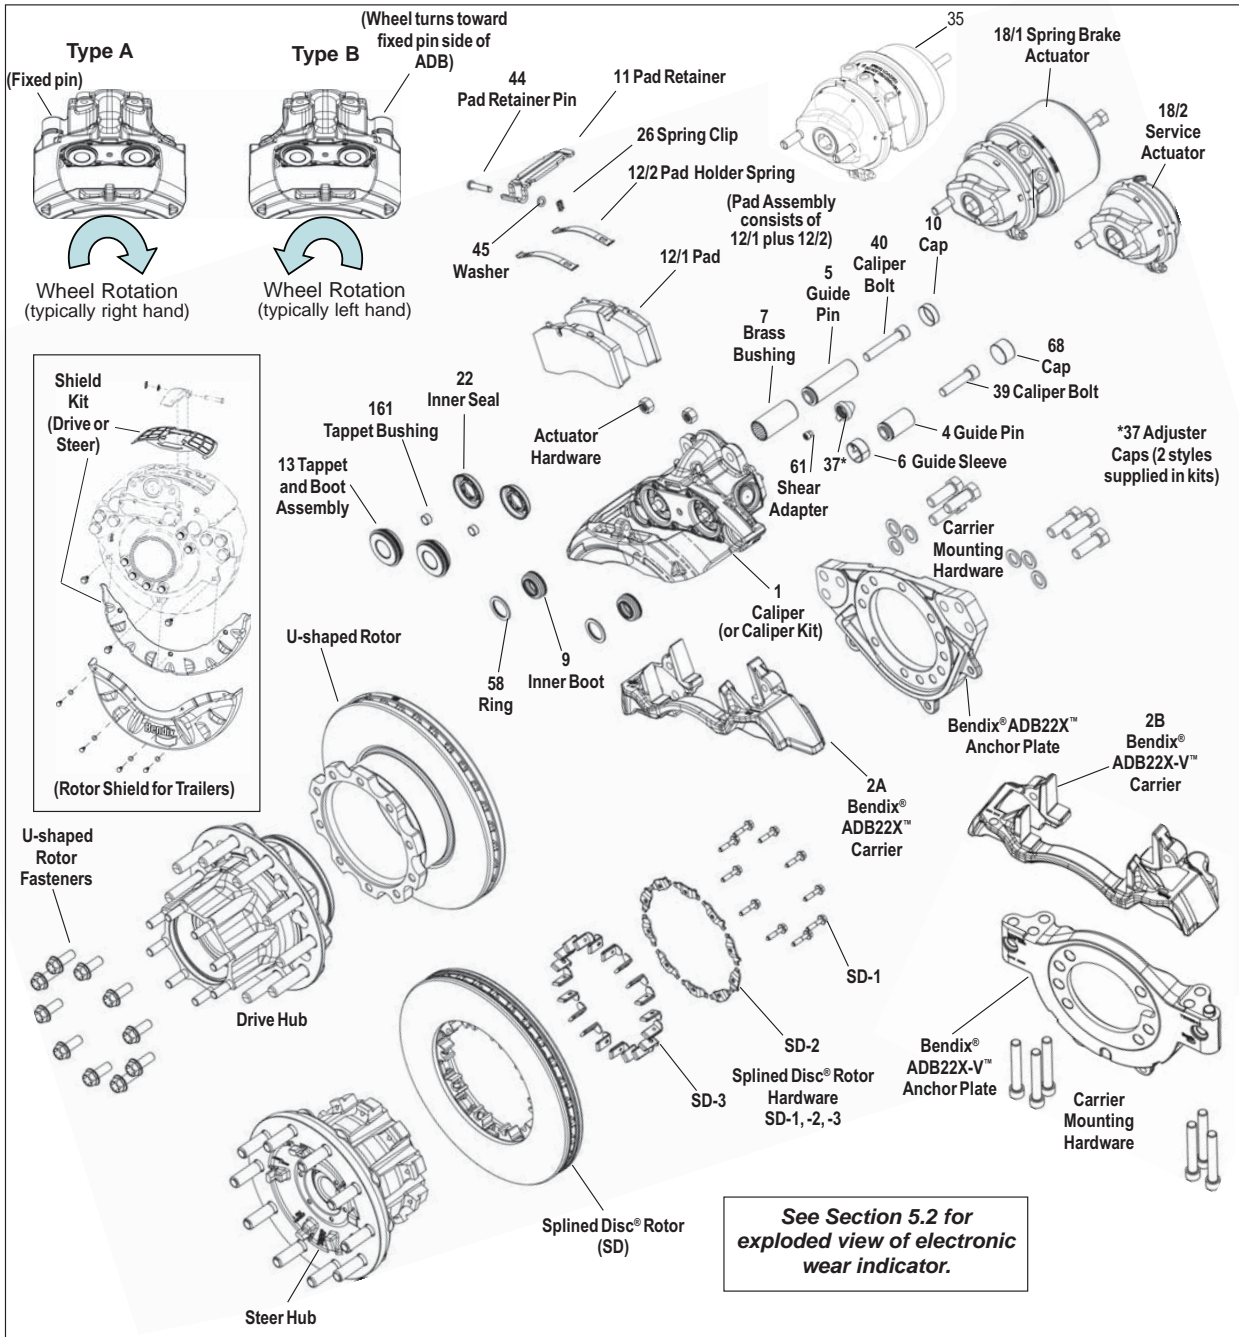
EXPLODED VIEW - BENDIX® ADB22X™ AND ADB22X-V™ AIR DISC BRAKES
